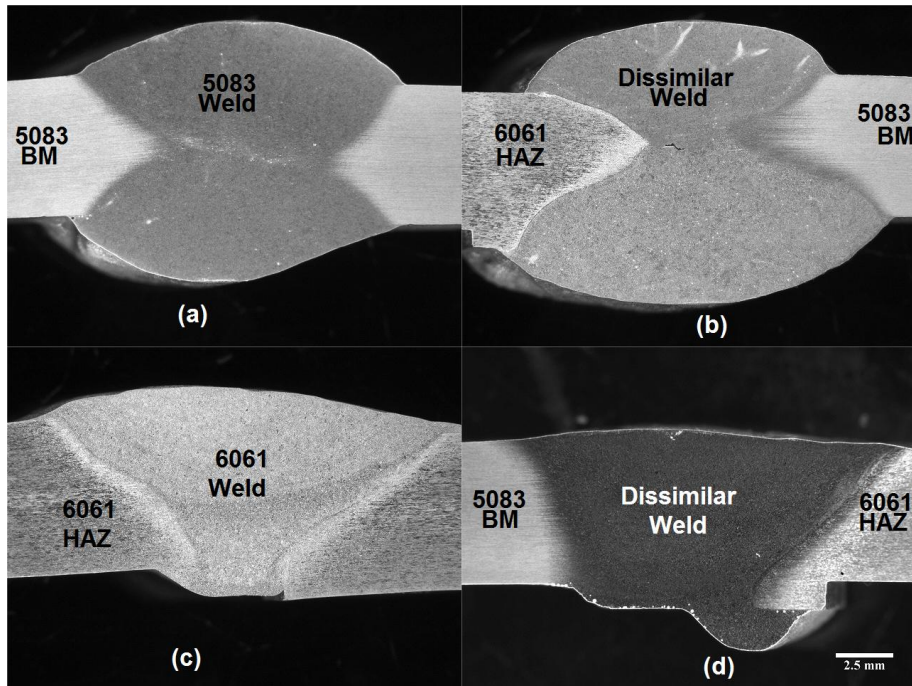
Representative weld macrographs: (a) Semi-automatic weld in 5083-H111; (b) semi-automatic dissimilar weld joining 5083-H111 and 6061-T651; (c) fully automatic weld in 6061-T651; and (d) fully automatic dissimilar weld joining 5083-H111 and 6061-T651 aluminium.
